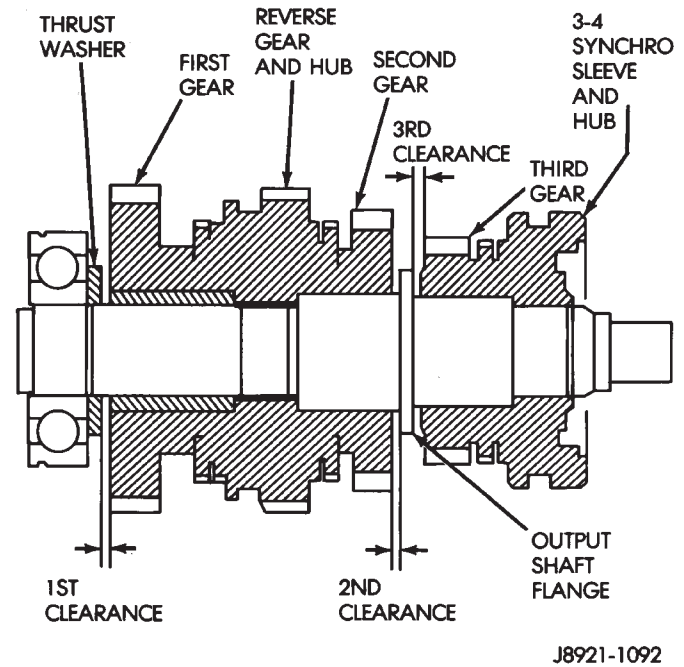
Checking Output Shaft Gear Thrust Clearance
